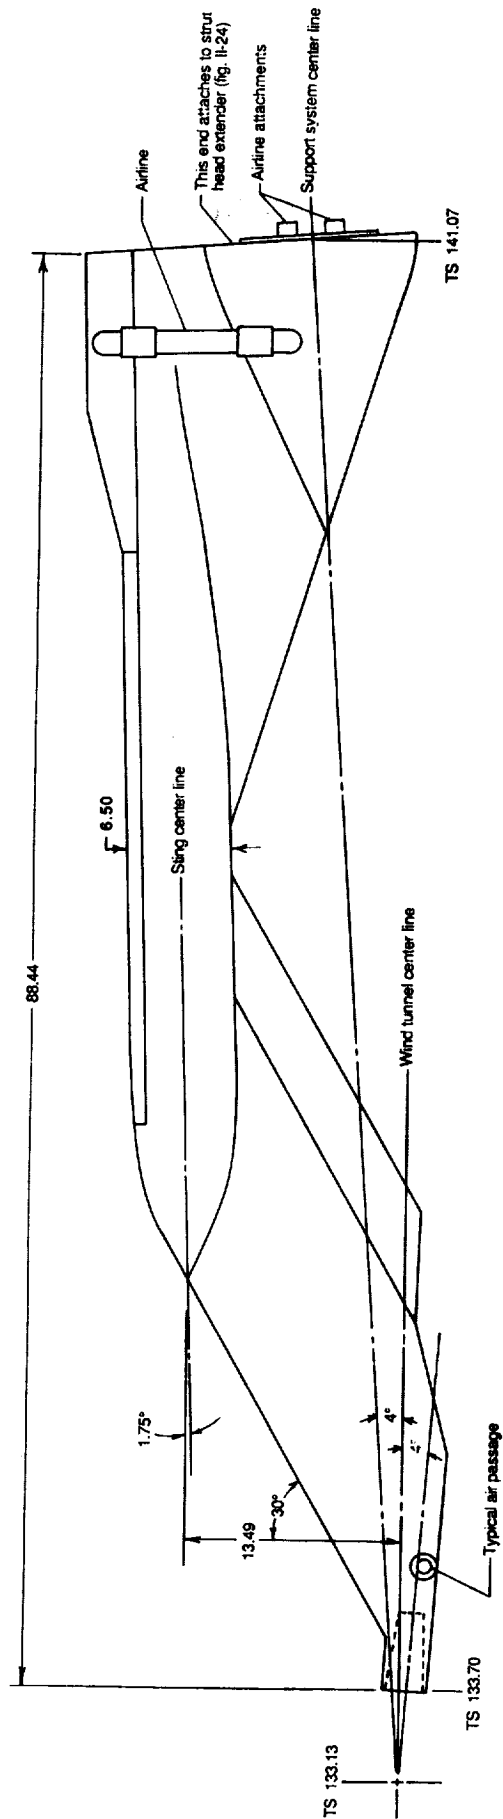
Sketch of Boeing sting-strut support system. All tunnel stations are in feet.
